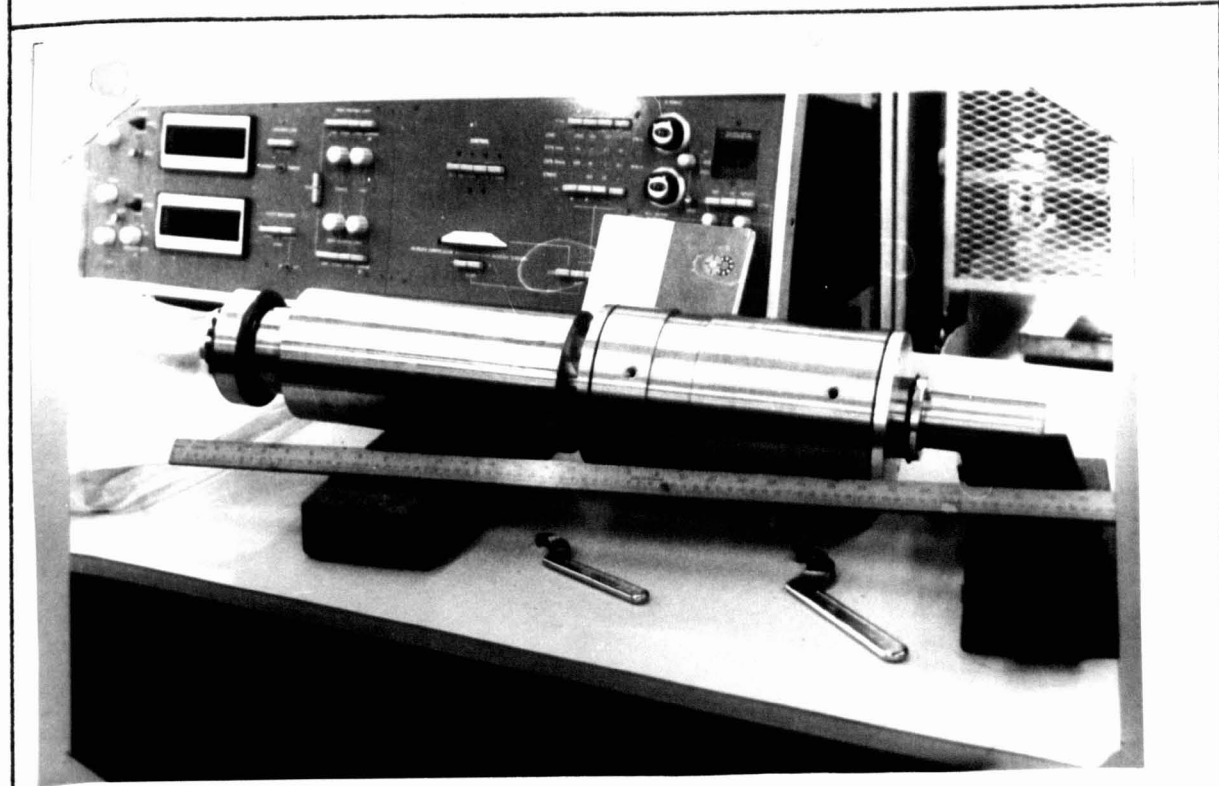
TEST SHAFT WITH THE THRUST AND TAIL BEARINGS HOUSING.
